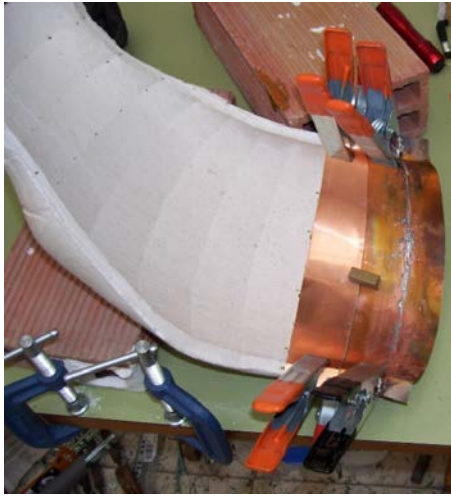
Shaping, fixing and soldering strips on the plaster form.
